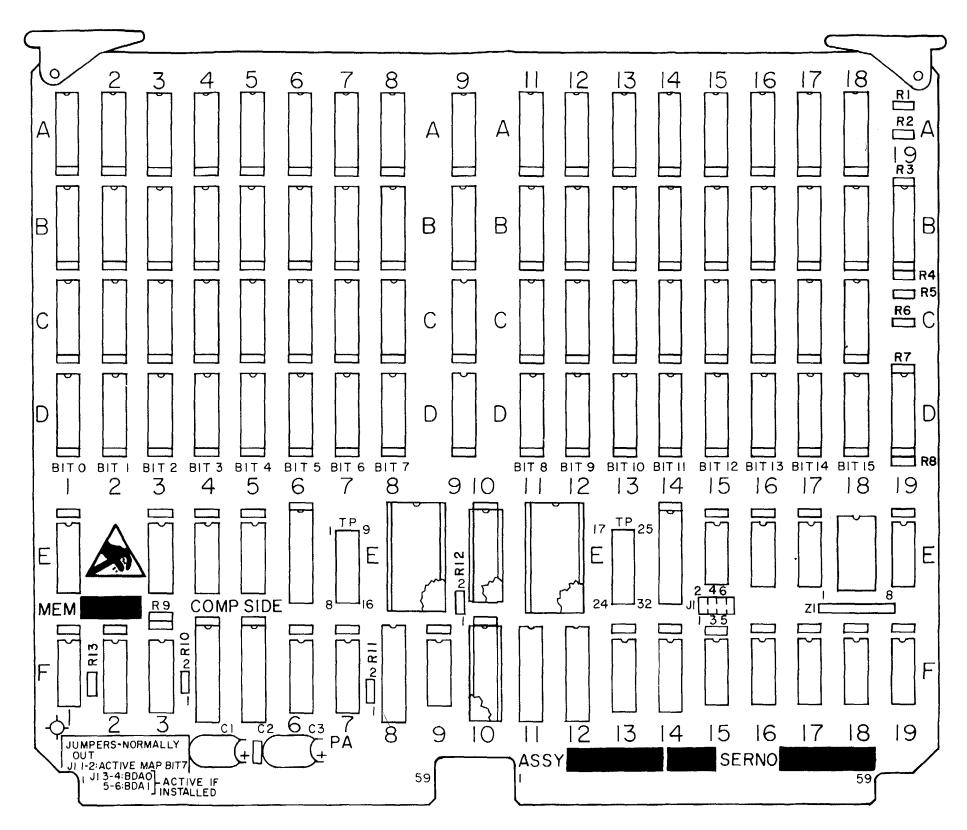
512K Memory Board 2235-2706 Assembly Drawing
